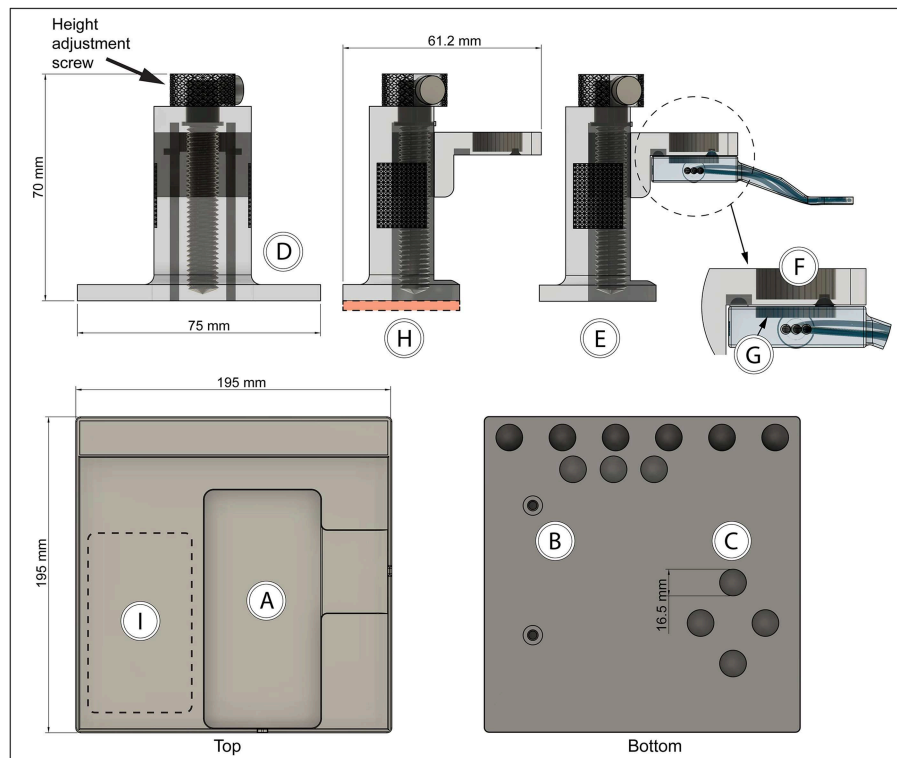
| Vacuum window holder and operating table with magnetic attachment points (A) Heating pad cutout, (B) M5 thread inserts, (C) neodymium magnet cutouts, (D) height-adjustable vacuum window holder—front view, (E) holder side view with vacuum window attached, (F) neodymium magnet position on holder, (G) steel plate position in vacuum window, (H) height-adjustable vacuum window holder—side view, red area indicates position of steel plate, (I) holder attachment area on table.
